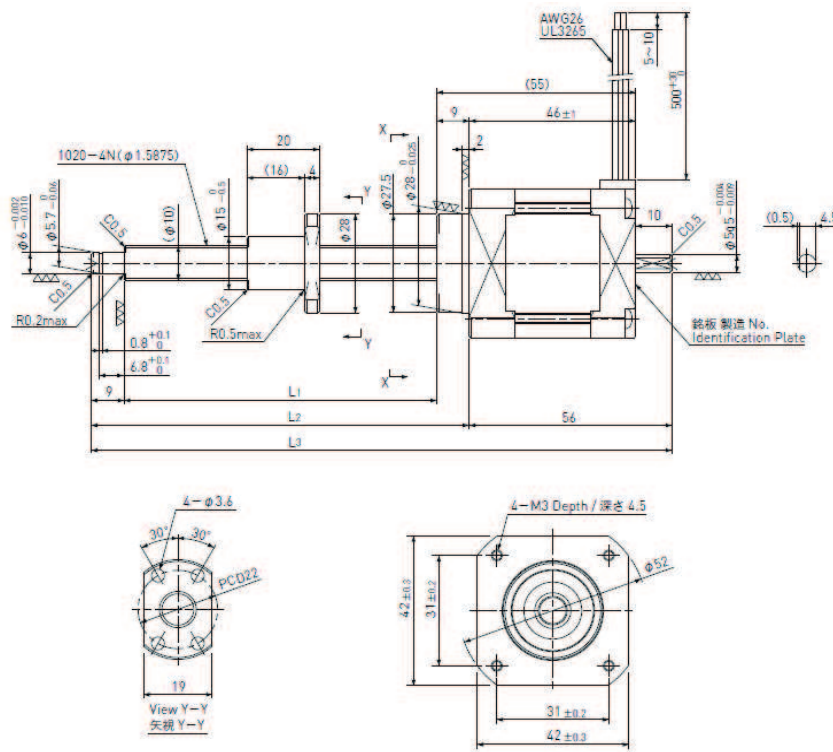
Technical drawing of the linear actuator KSS ReMoBo 1020B-300
